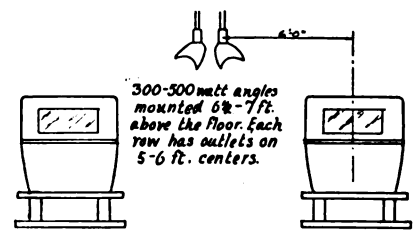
Lighting arrangement for the conveyor line when work is being done on the exterior of the automobile bodies.
